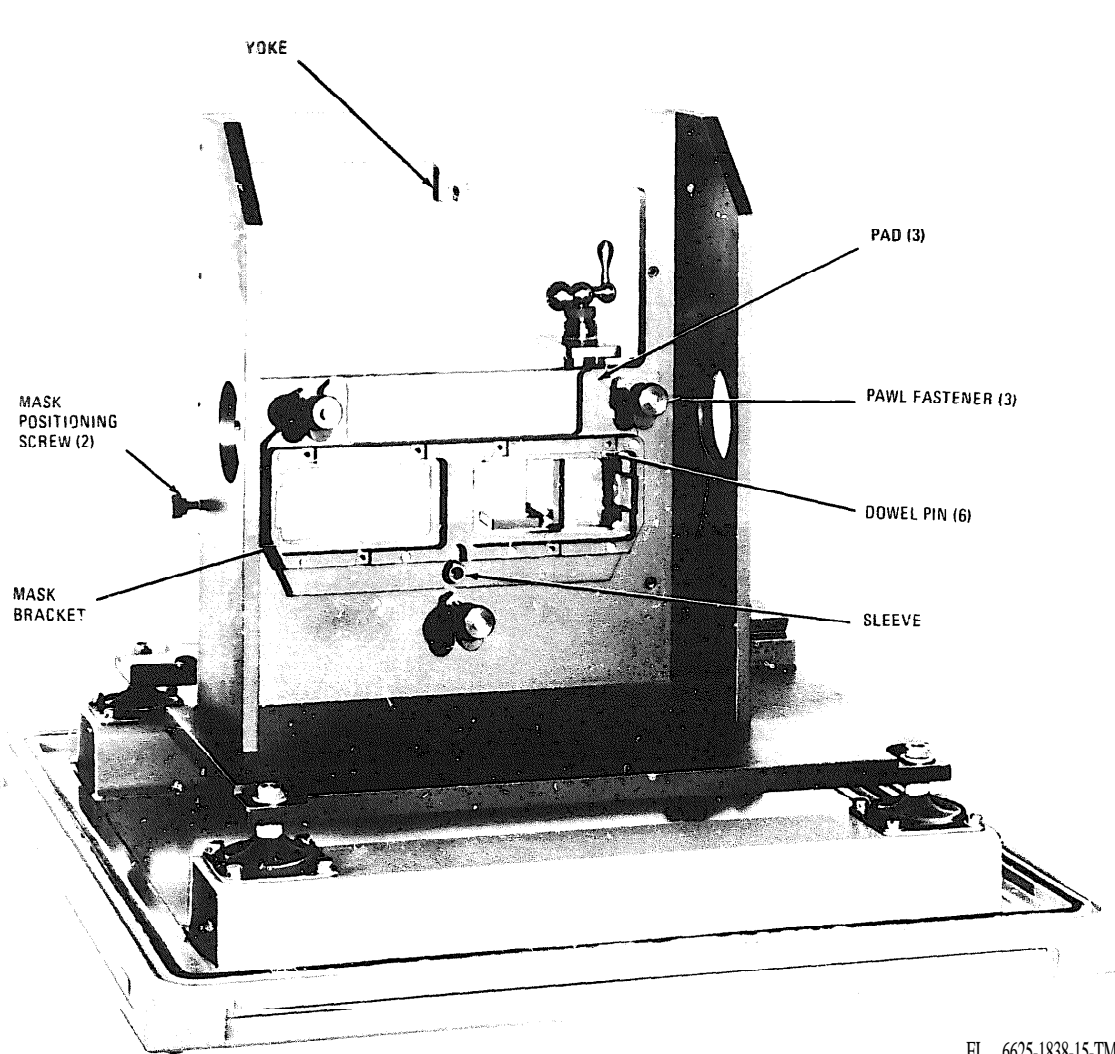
Test Fixture, Optical Alignment TS-2966/APS-94D, less minor components.
